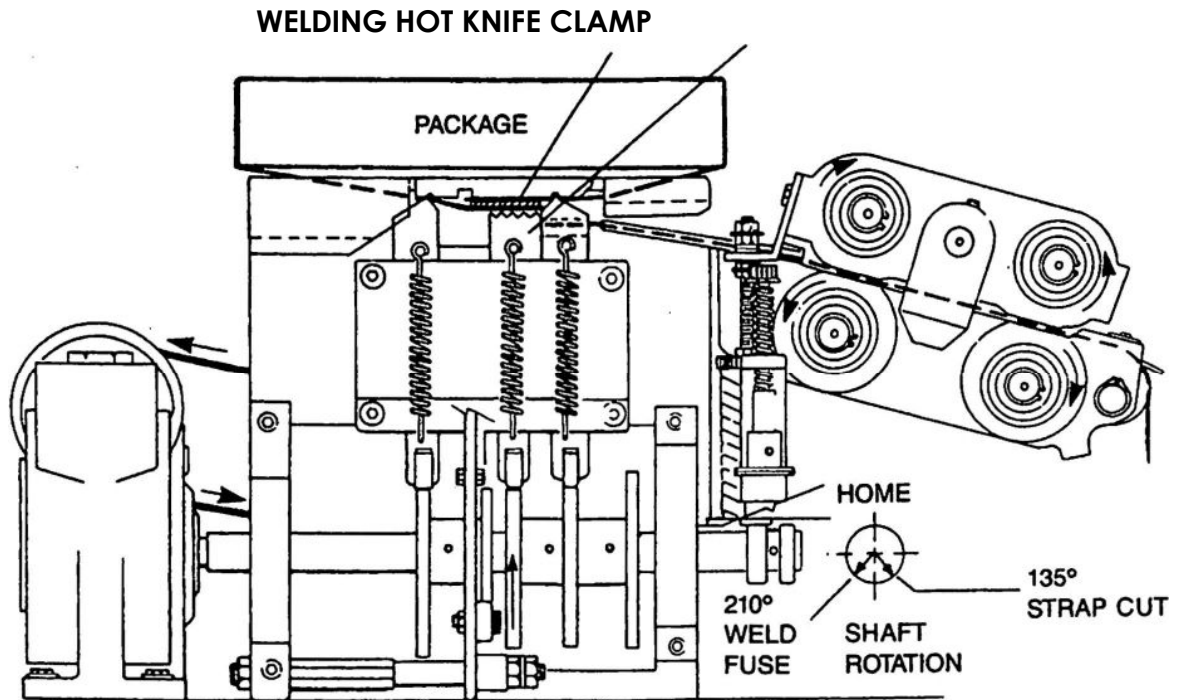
STRAP IS CUT & WELD IS MADE
